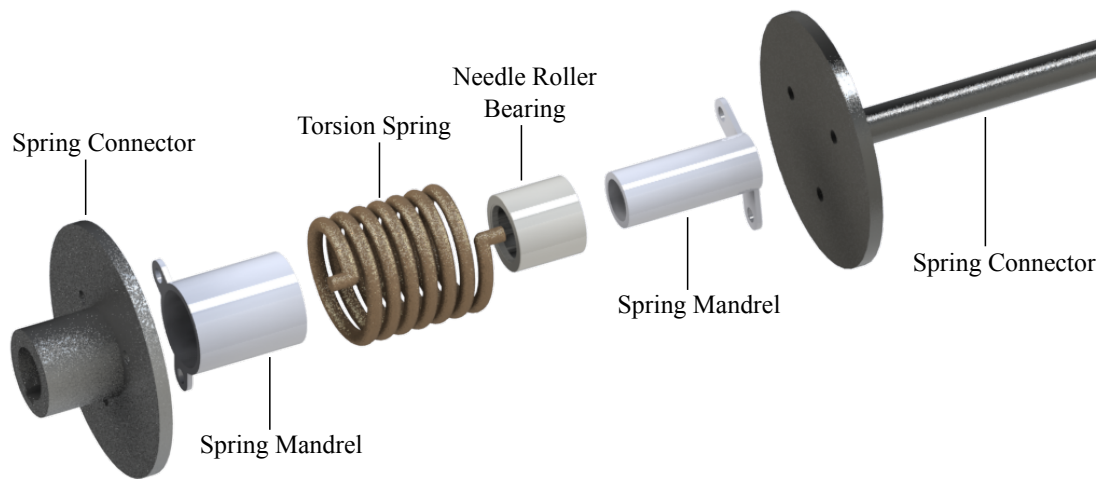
CAD model of the spring assembly of exoskeleton version 2.
